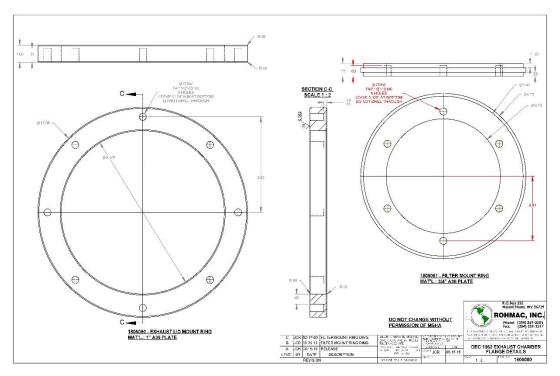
Revised Diesel Power Package Flange Detail Drawing
